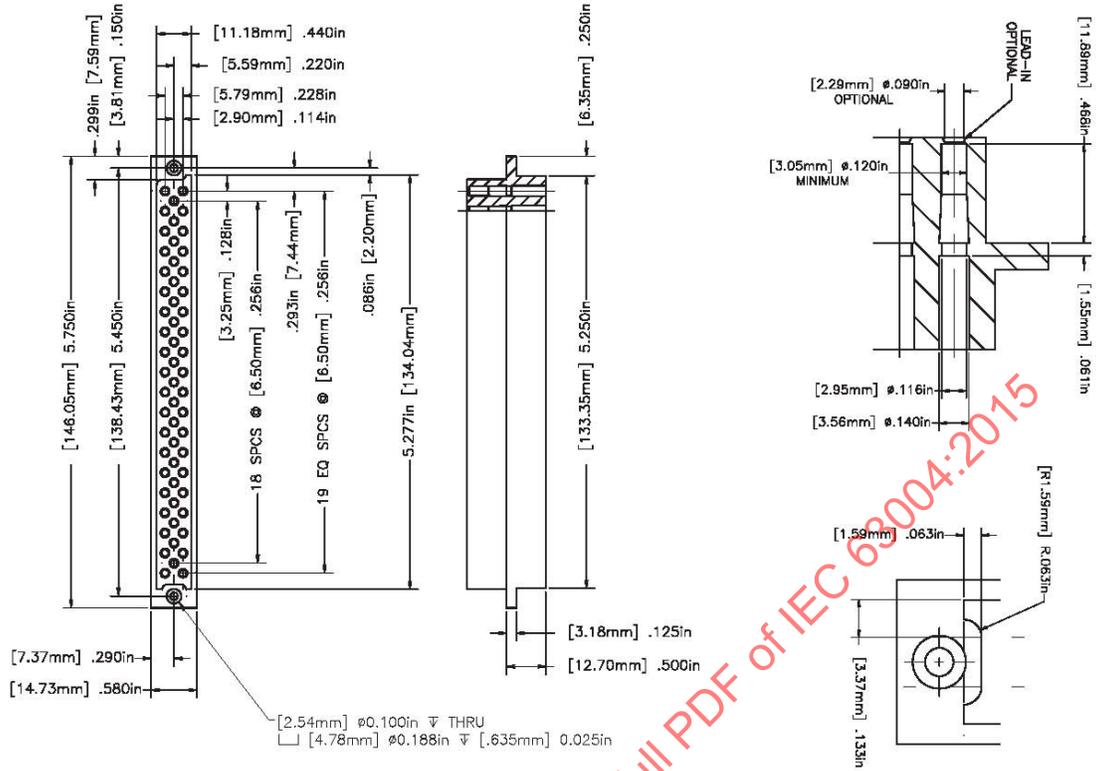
Power module, 59 position for 23 A contact, receiver housing physical layout
